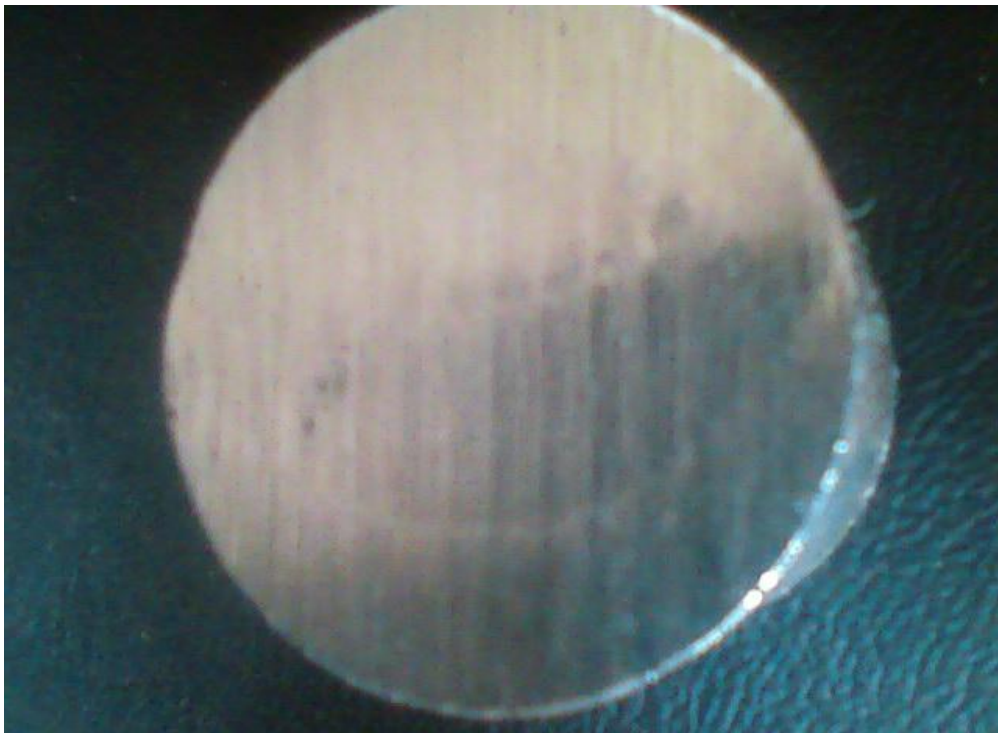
Surface condition of stainless steel after has been cutted with bendsaw machine
